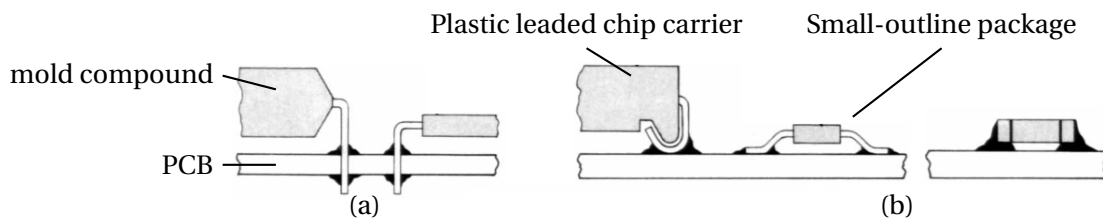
(a) Through hole technology (b) Surface Mount Technology. Extracted from [7].
